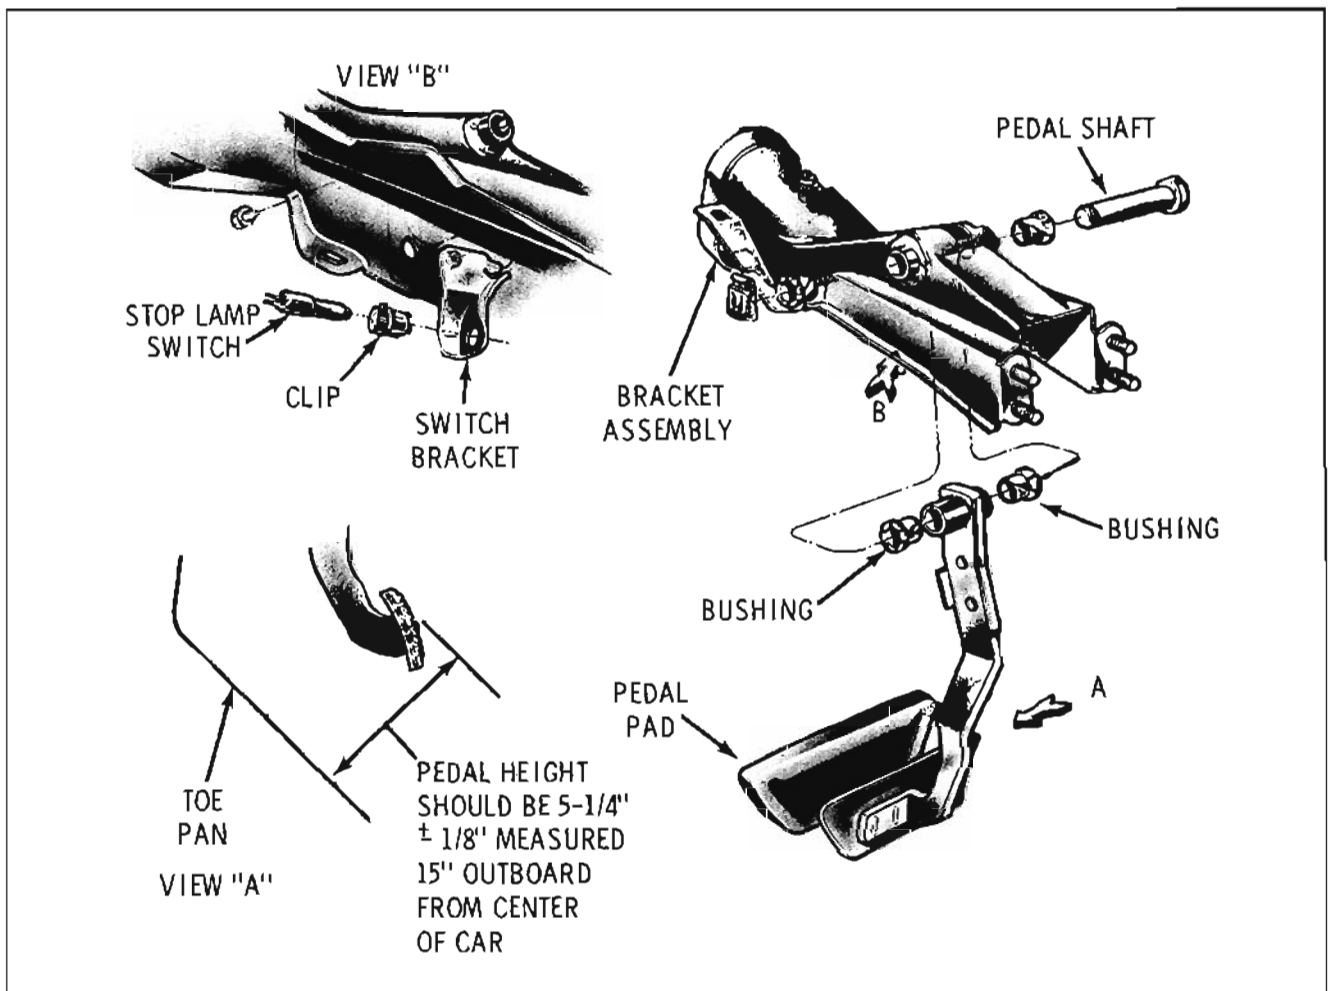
Power Brake Mounting (30, 31 & 32 Series)
